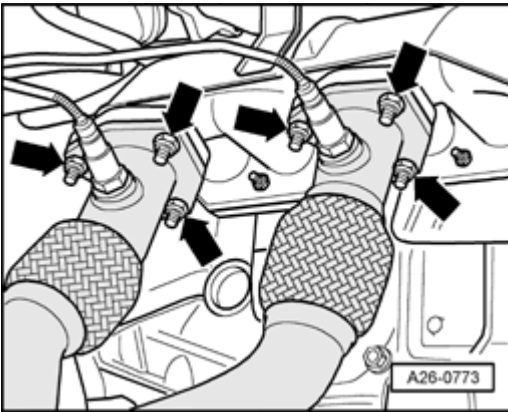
Unbolting Front Exhaust Pipe At Exhaust Manifold
